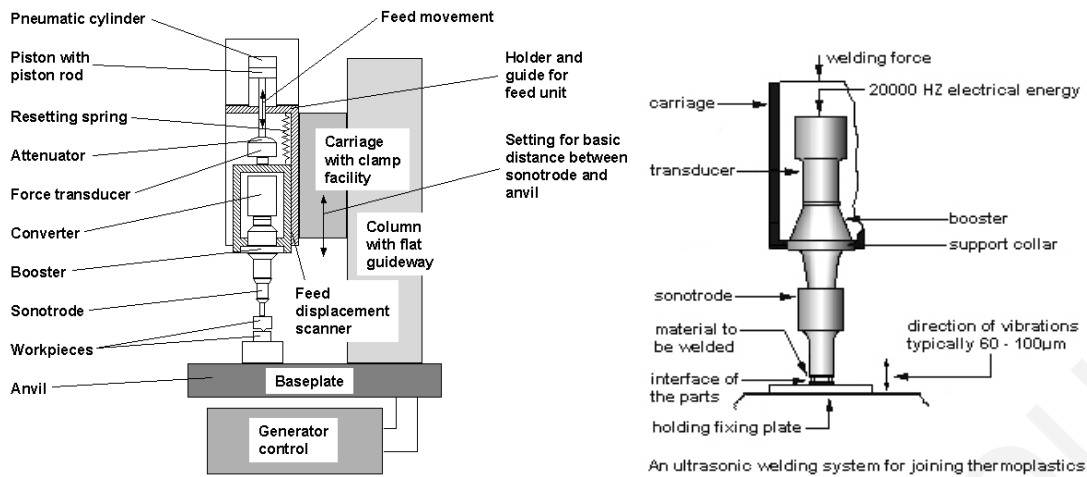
Schematic drawing of an ultrasonic welding machine [72-73]
